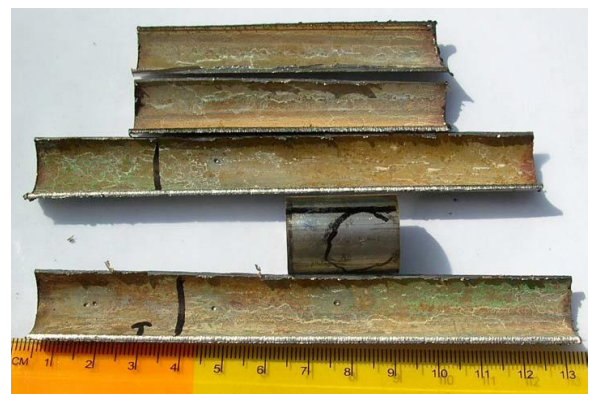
Pitting corrosion of vaporizer tubes
